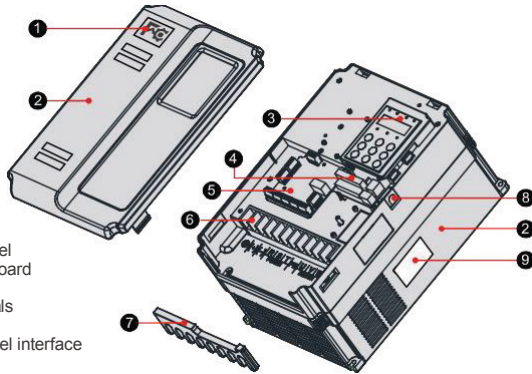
Exploded view of the Q1200 (7.5-15kW, plastic housing)
